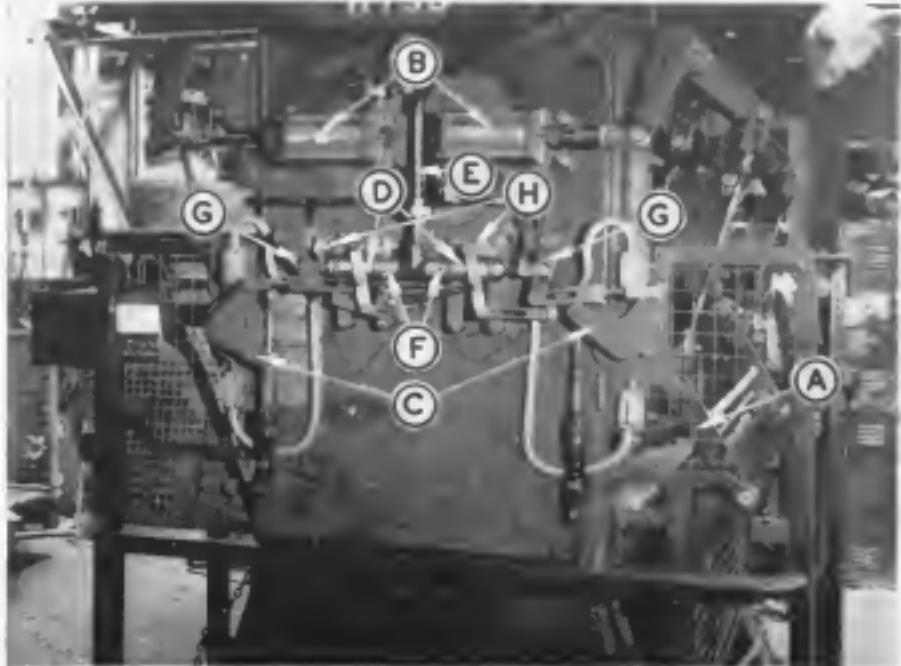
This shows the right-hand guard in the inner or feeding position with its associated cut-off valve ready to open if an unexpected stroke should occur. The left-hand guard is extended and the associated cut-off valve is held in the closed position by the catch H. (a full description of the device is contained in Appendix 5).
